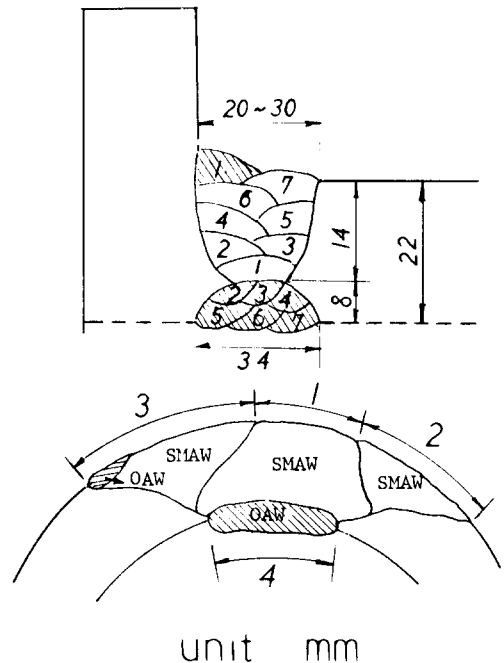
Schematic diagram of repair joint showing welding layers
